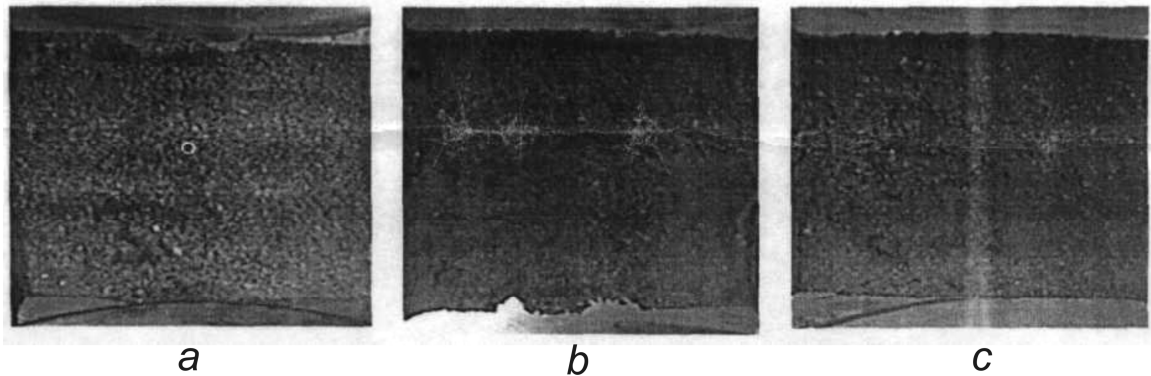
Incisions trial castings: a) casting made in the form of a mixture of existing shop; b) casting, made in the form of a mixture with the additive NIR; c) casting made in the form of a mixture with the additive
